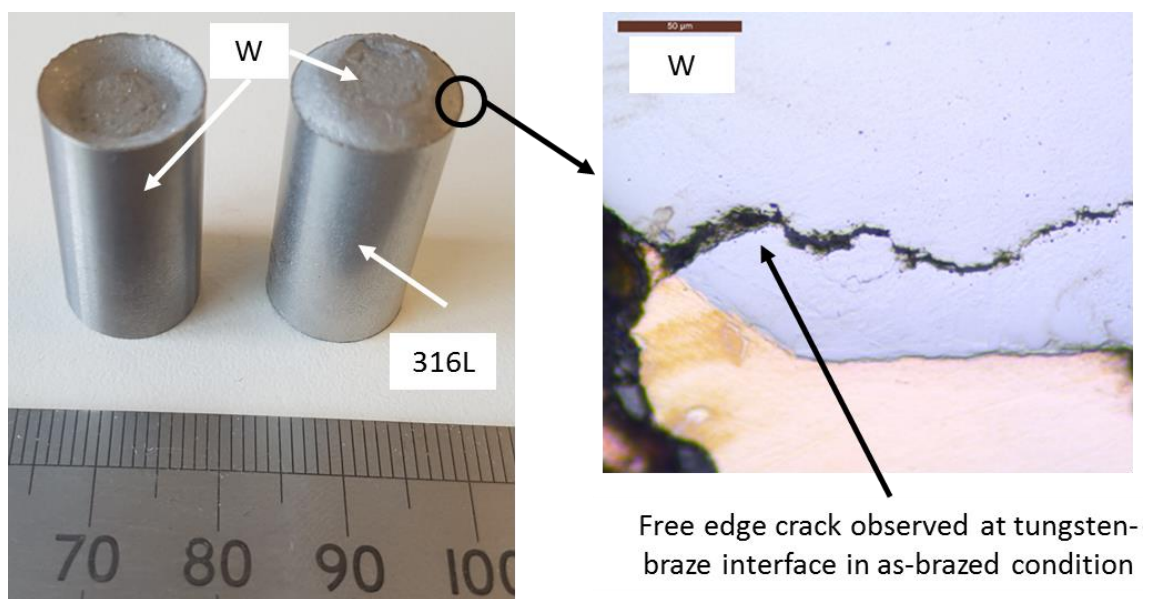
Fracture of W-AuCu-316L thermal autofrettaged part and previously observed crack in similar part
